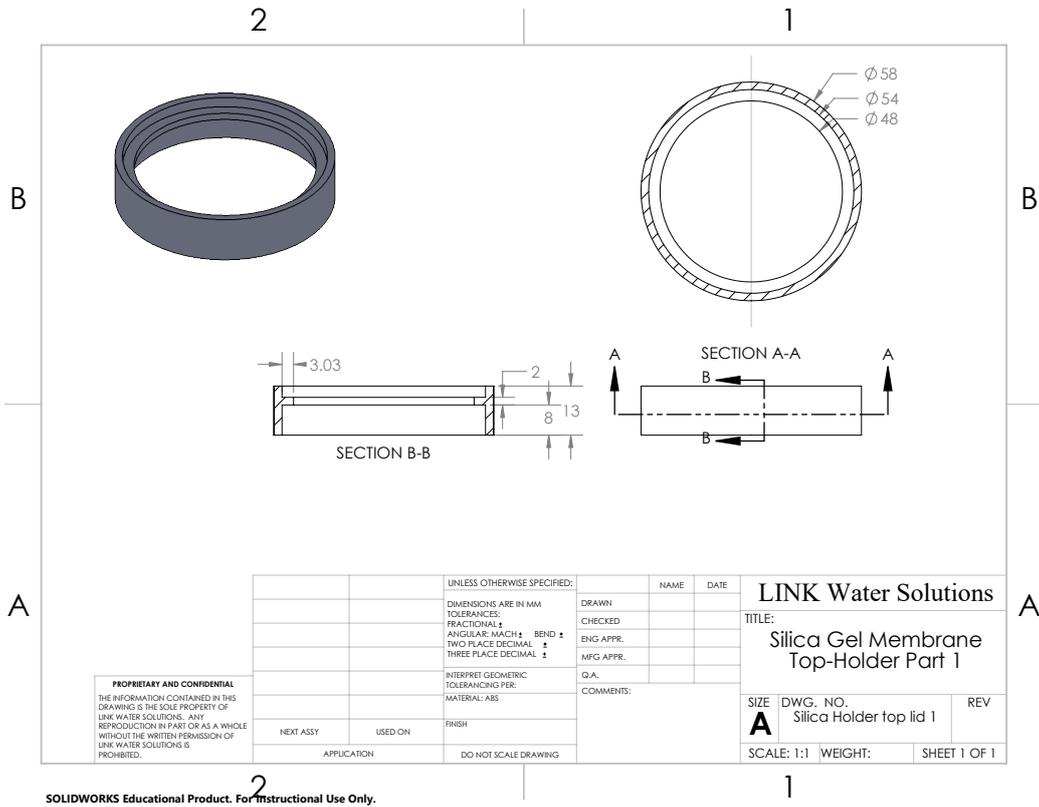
Technical drawing of the top lid of membrane holder of the silica gel holder: Part 1
